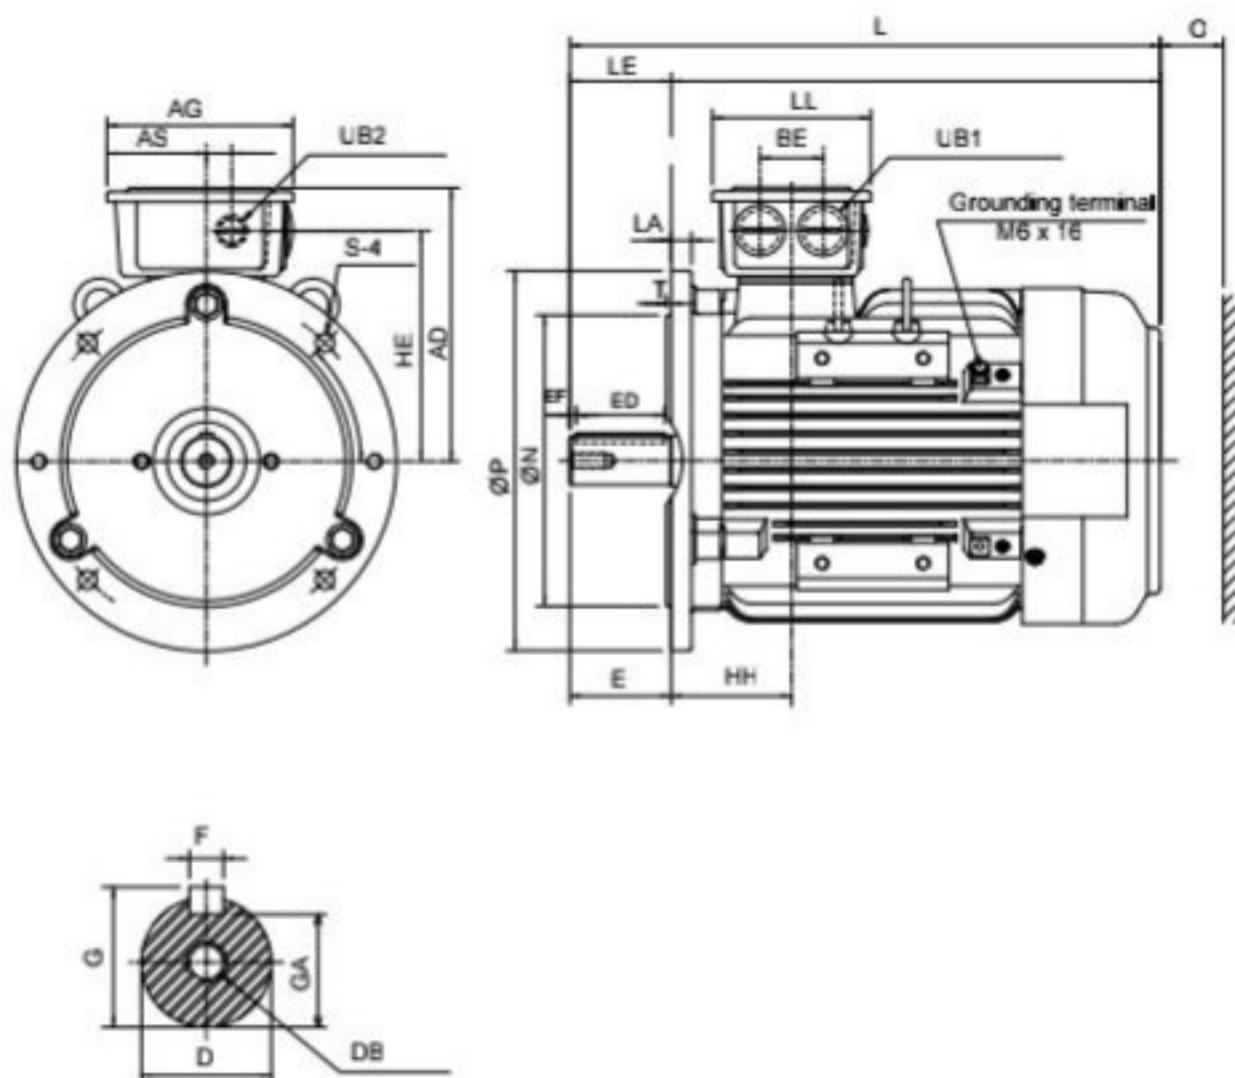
Outline drawing of cast iron design, flange version, mounting B5, frame size 160 – 180
